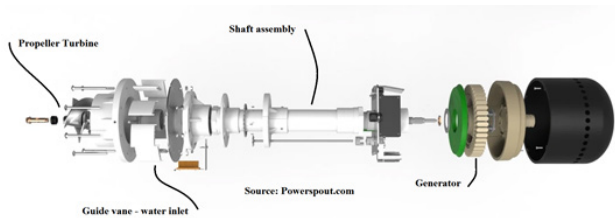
Propeller Turbine Generator (Exploded view)<sup>36</sup>
